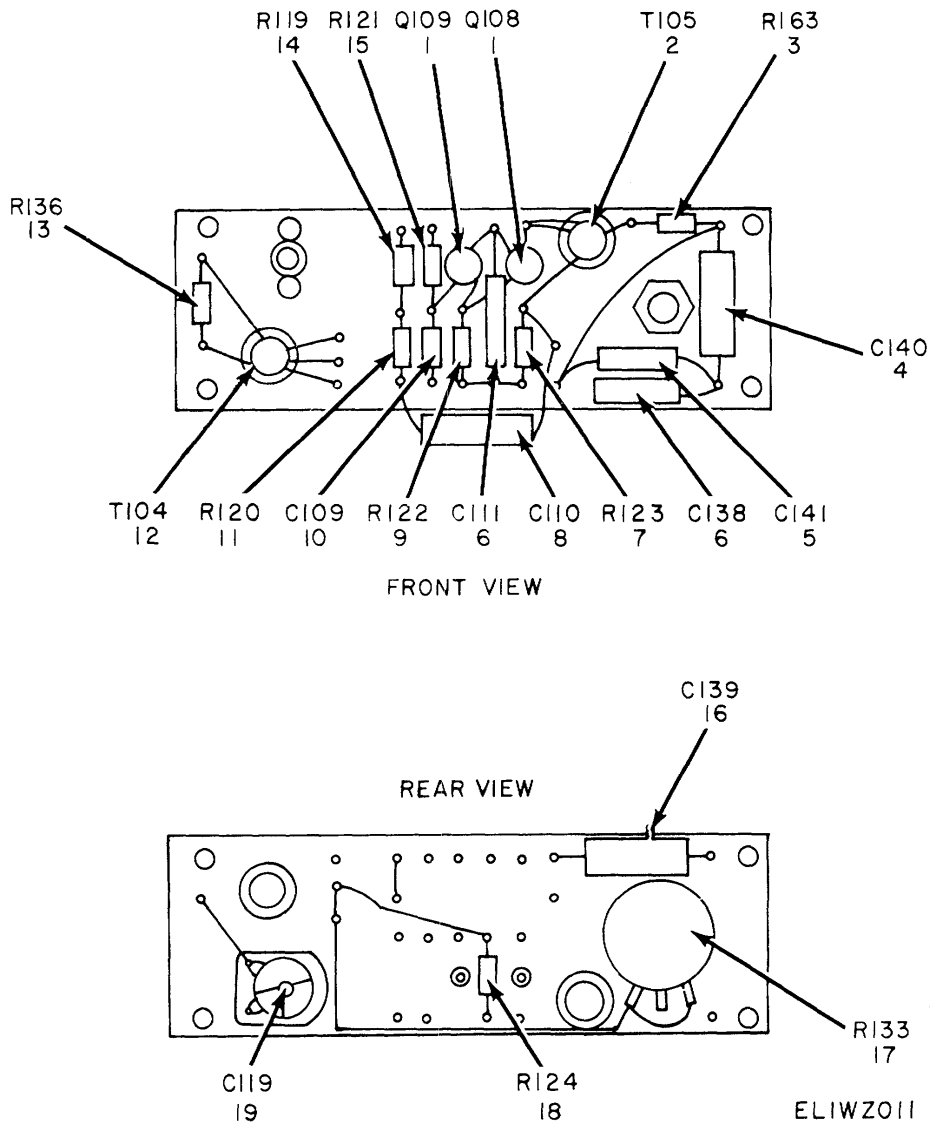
Test Set, Insulated Boot TS-1811/GSM-83, Bridge Board Assembly TB103.
